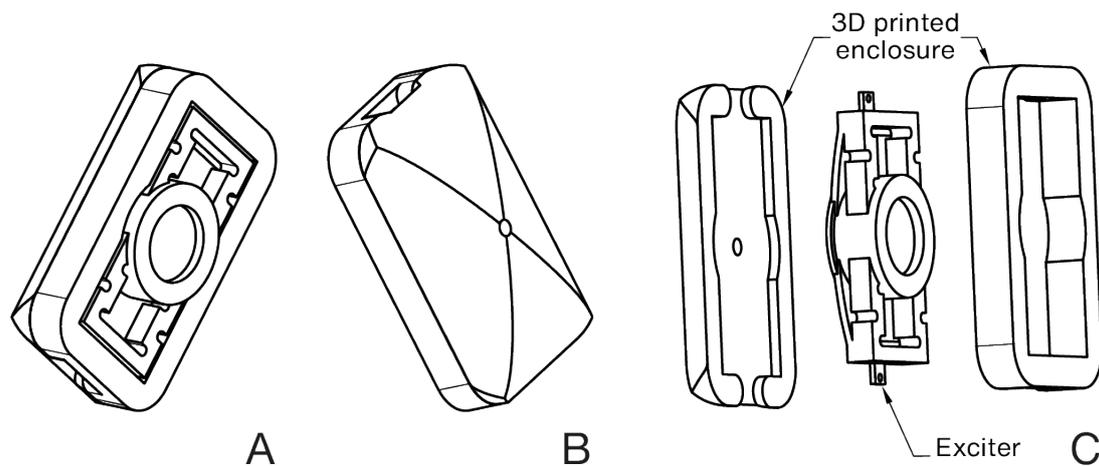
The assembly housing the moving coil exciter to be positioned on the wearer's cheek. A and B show, respectively, the front and back views of the assembly. C shows an exploded view of the assembly, with the exciter firmly secured between the 3D printed parts.
